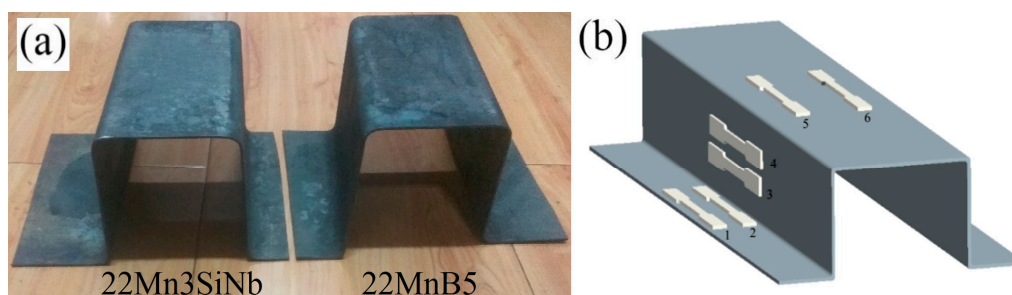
The U-shaped parts and sample location diagram. (a) U-channel parts, (b) sample location.
